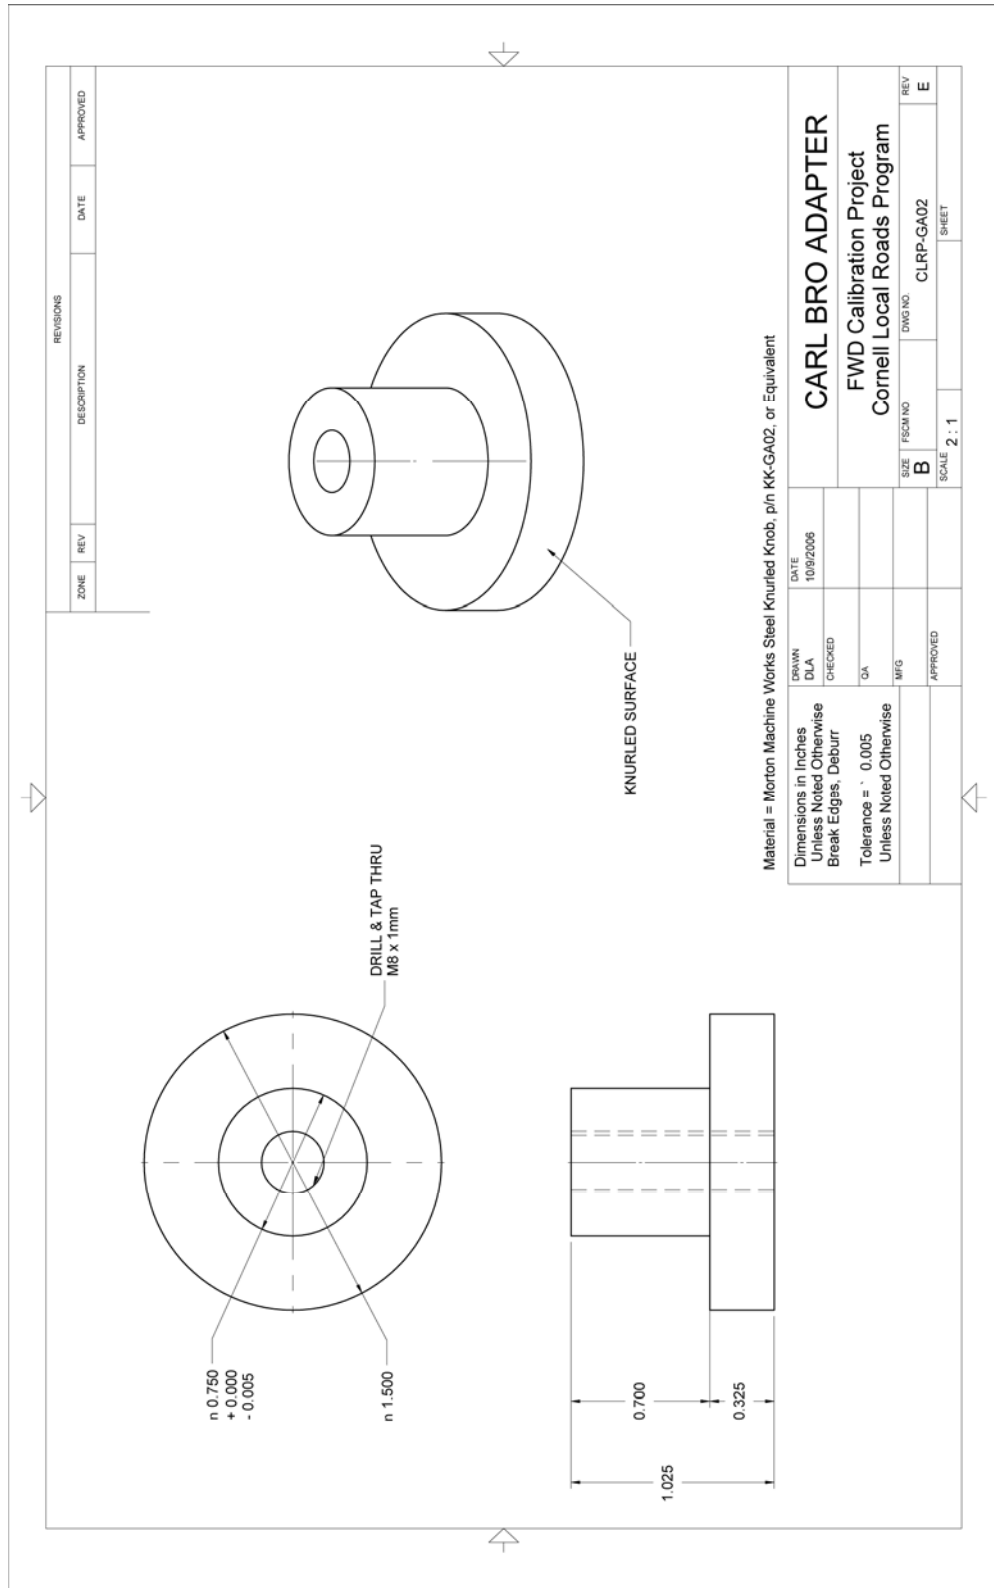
Drawing. CLRP-GA02 Carl Bro Adapter.
